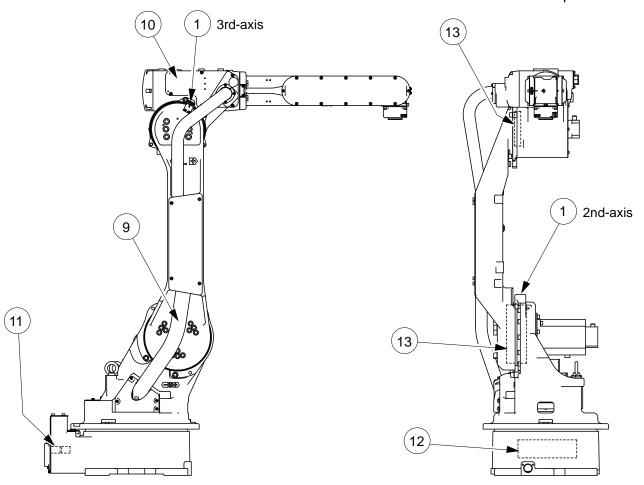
Inspection Parts and Numbers (1 of 2)
